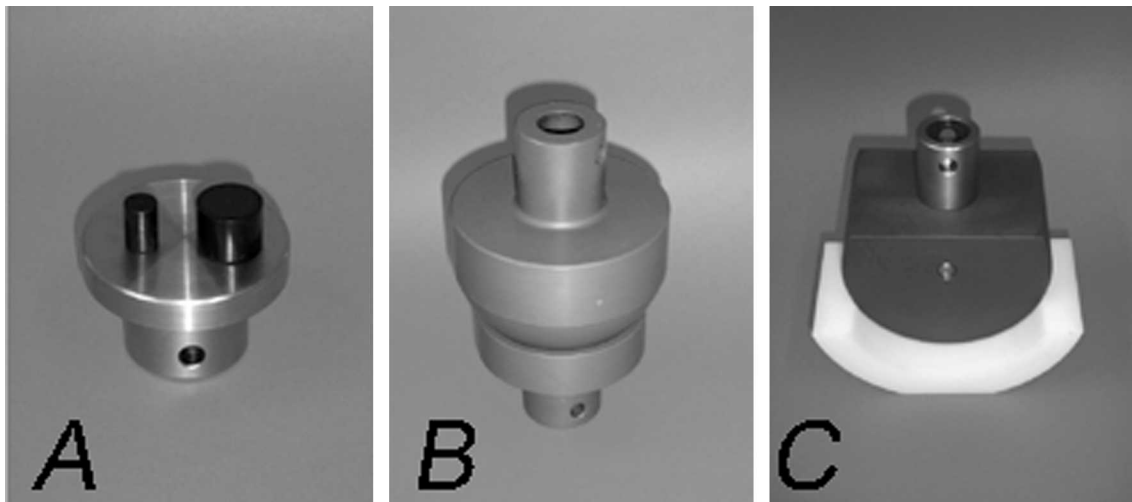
A–C. The (A) flat, (B) spherical, and (C) cylindrical surfaces of the loading fixtures are shown.
